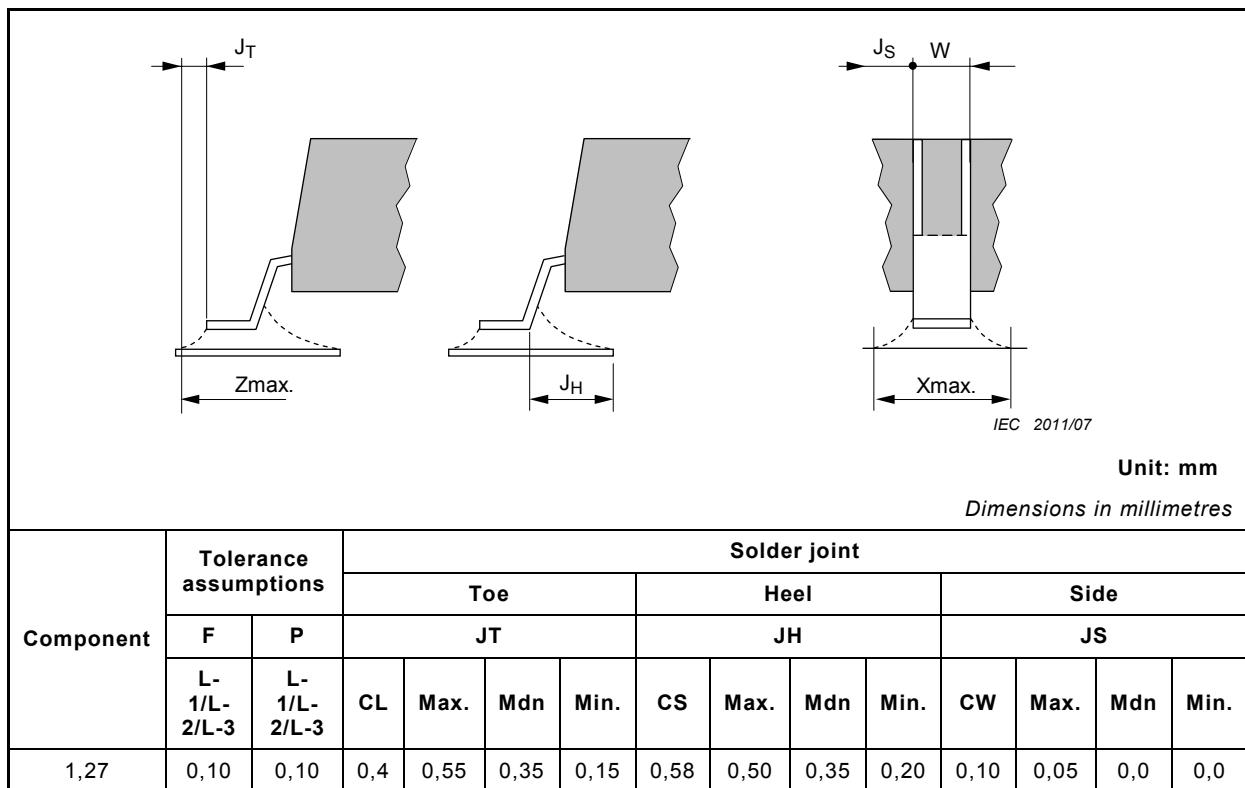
Solder joint fillet design (see IEC 61188-5-1, Table 2)
